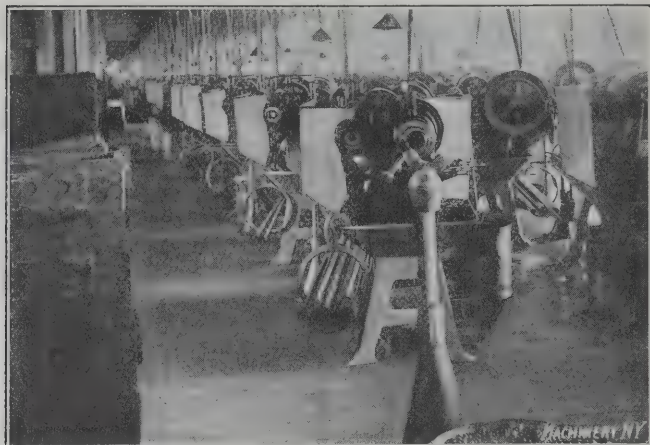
Battery of 340 Automatic Screw Machines, equipped with Splash Guards
